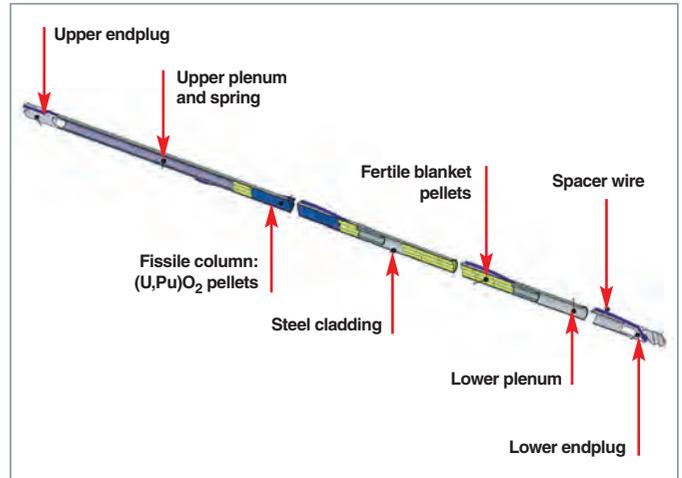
Exploded view of an SFR fuel pin, showing its main components.
